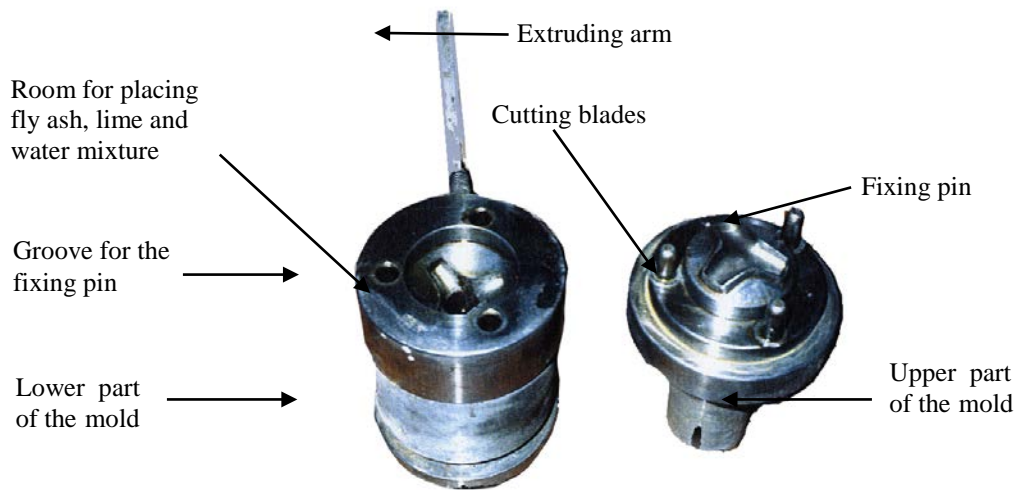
A Specially Designed Mold Used for Producing Tetrapods.
